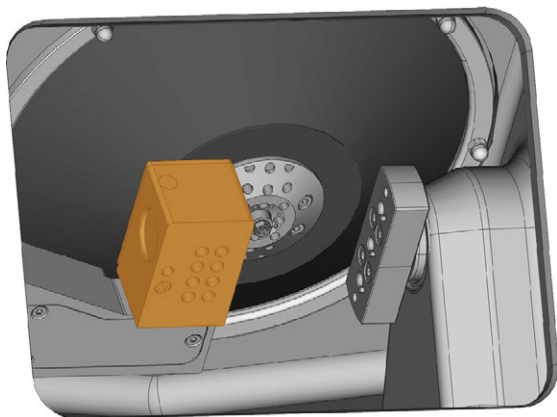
TOOL MAGAZINE IN THE WORKING CHAMBER (MARKED ORANGE)
